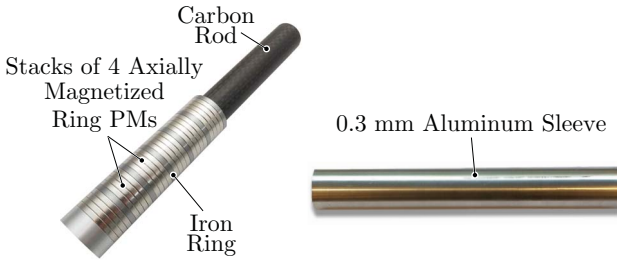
Built mover prototype: axially magnetized ring PMs are stack on a light-weight carbon rod. Finally, the whole assembly is inserted into a 0.3 mm thick aluminum sleeve that protects the PMs. The smooth conductive surface of the sleeve is be used for eddy-current radial position sensing.
